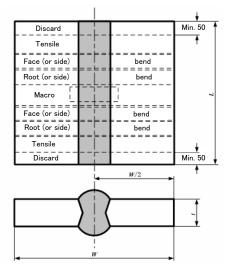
Welding Procedure Qualification Test assemblies (Unit: *mm*) (continued)
